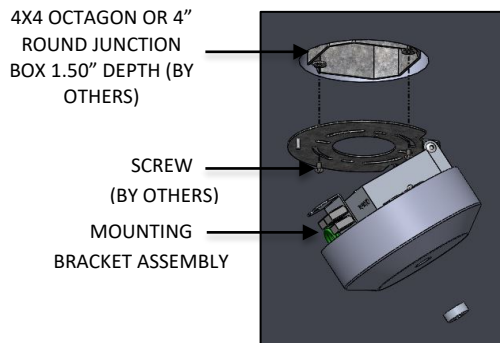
MOUNTING BRACKET ASSEMBLY INSTALLATION
